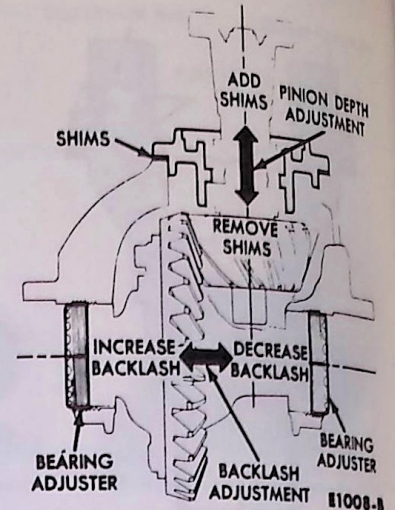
Pinion and Ring Gear Tooth Contact Adjustment—Except Dana
